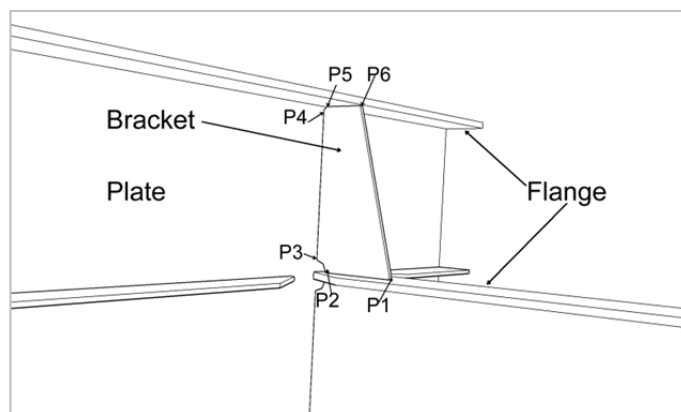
Example of a Bracket Touching a Plate and Flanges
